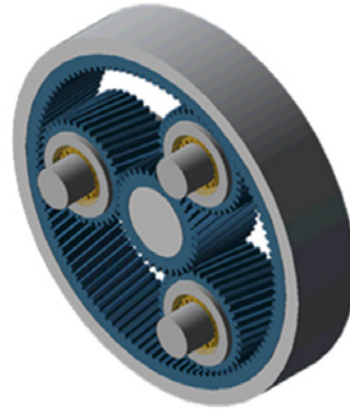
Planetary gear unit design using the *FVA-Workbench*.
